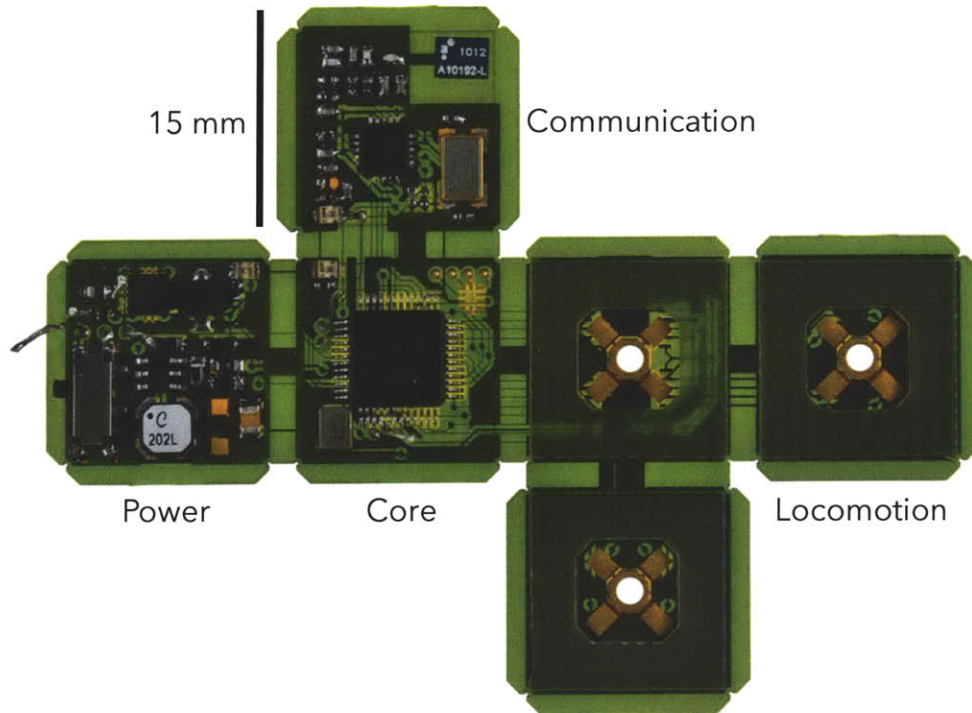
Mark 2 flex PCB prior to final assembly.
